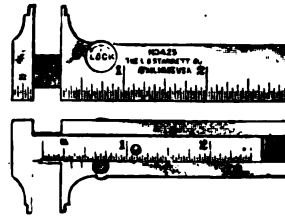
A pocket slide rule, also called a caliper rule—usually made in 3 in. lengths. Graduated in 32nds on one side, and in 64ths on the other. Handy for measuring sheet or bar stock, wire, tubing, etc.
